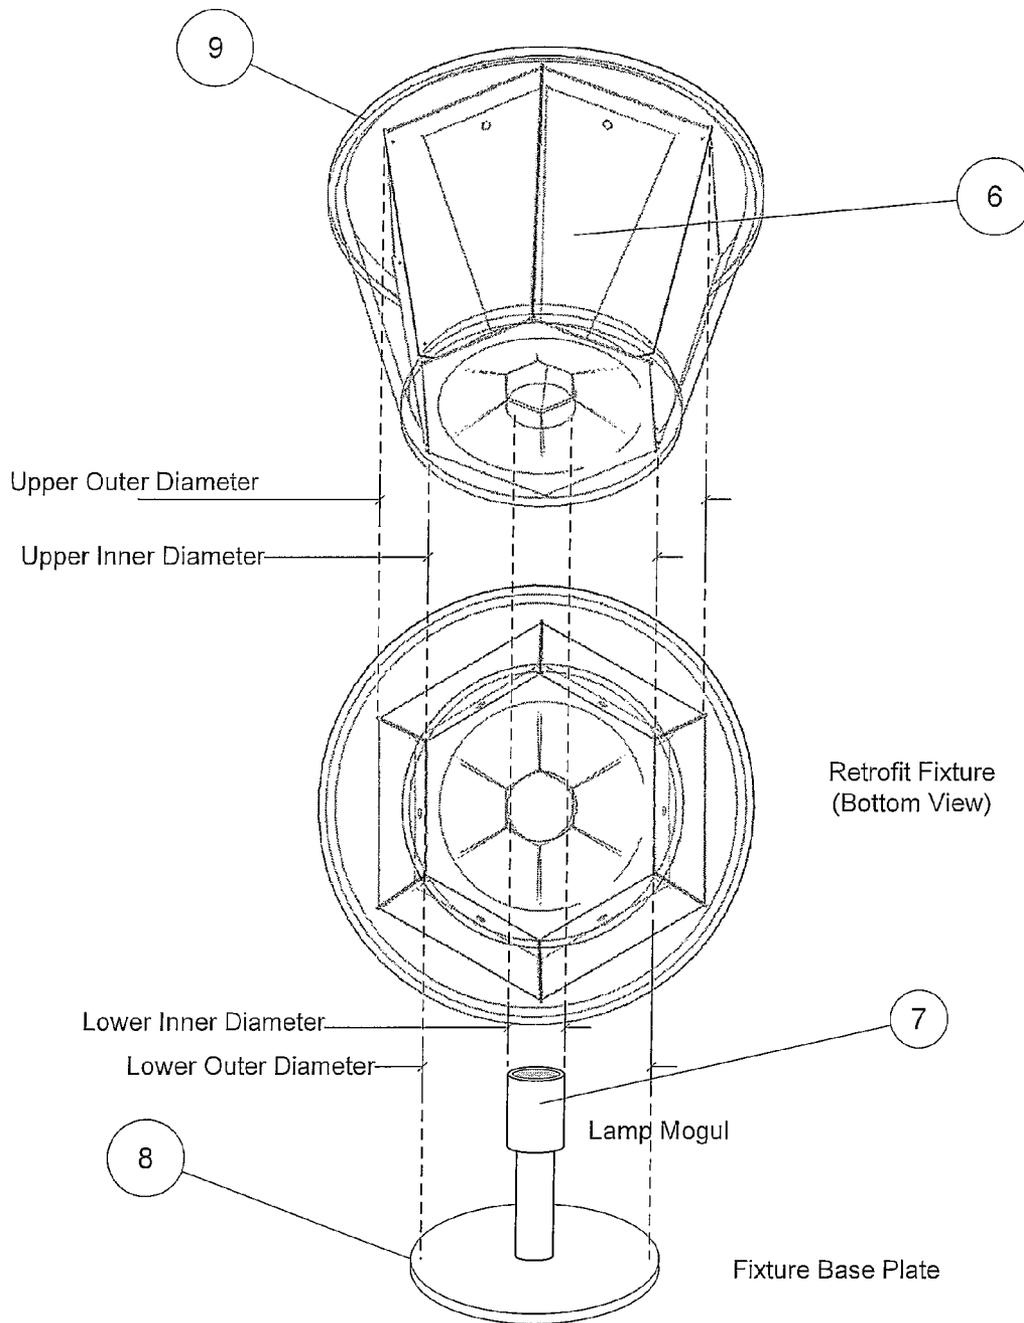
Six Sided Led Fixture Assembly 16.7 Degree Tilt
